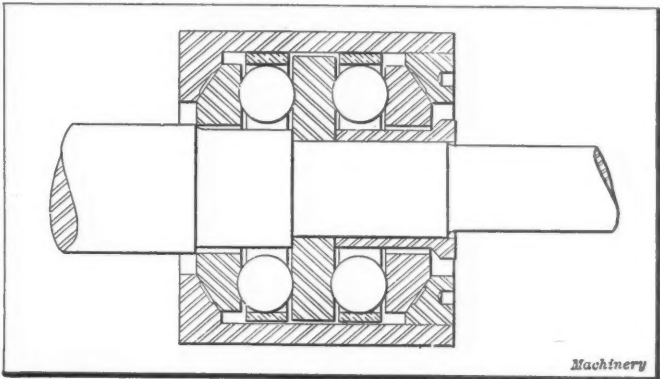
A Ball Bearing taking Thrust in Both Directions
